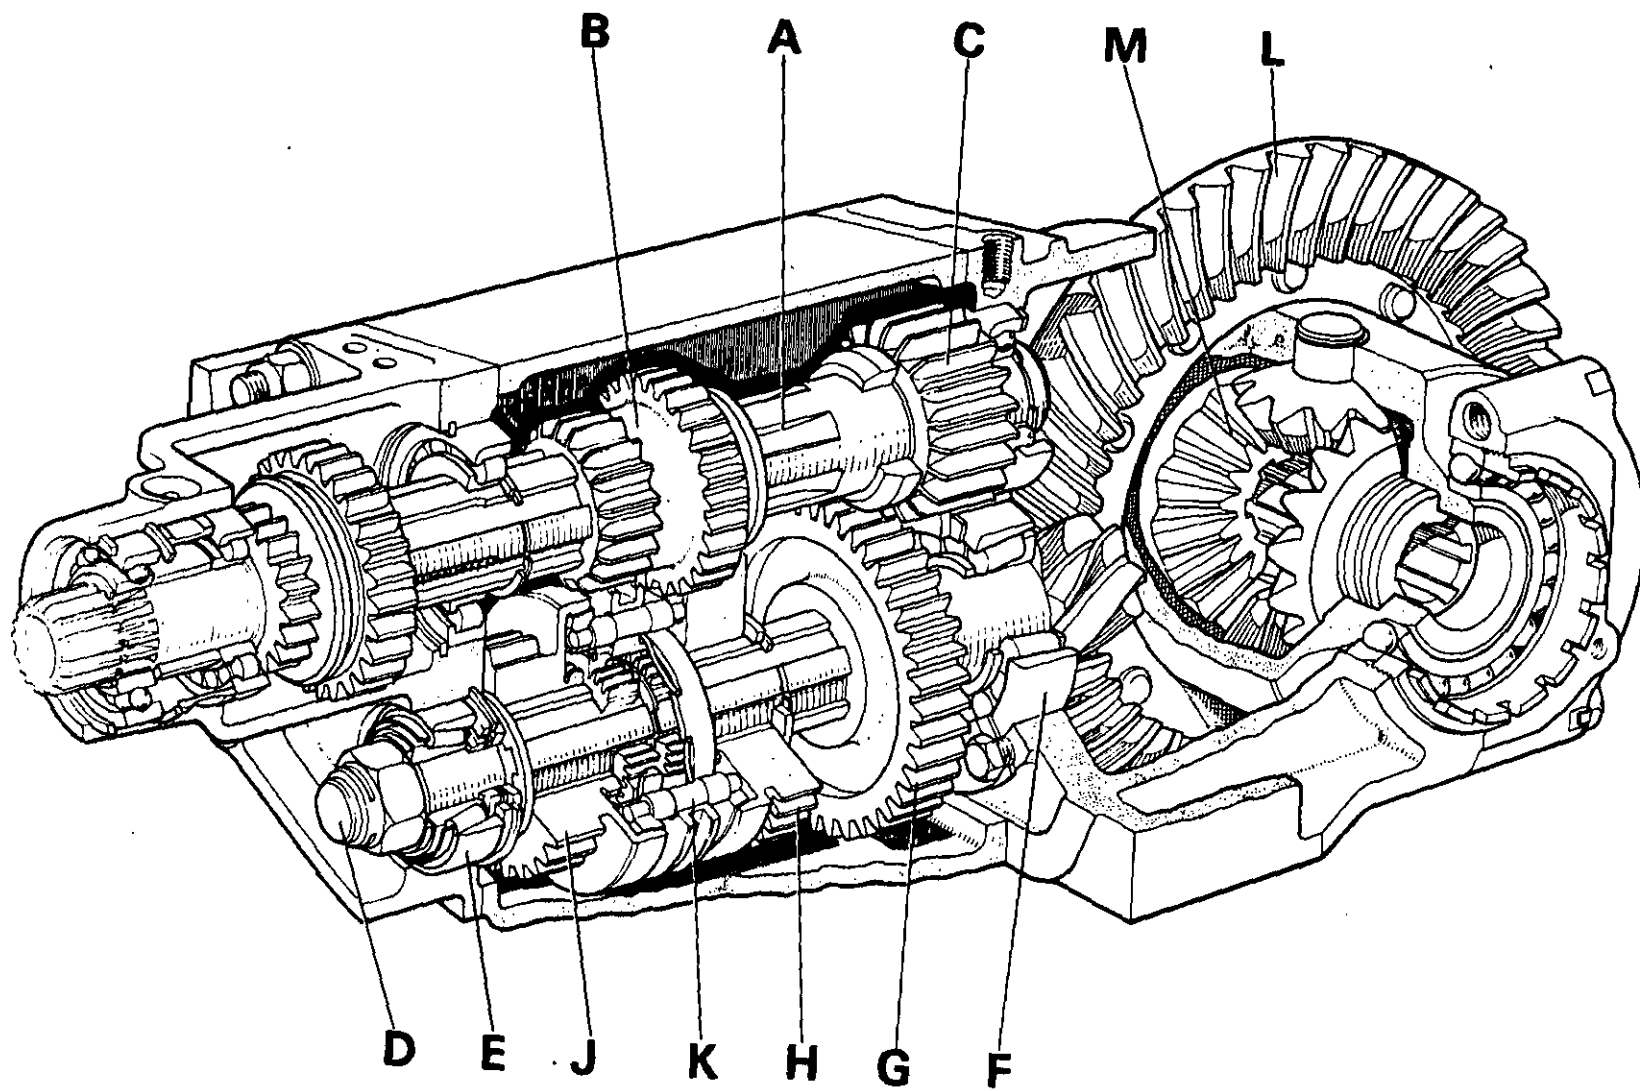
TWELVE-SPEED SYNCHROMESH GEARBOX — 1210 TRACTORS
